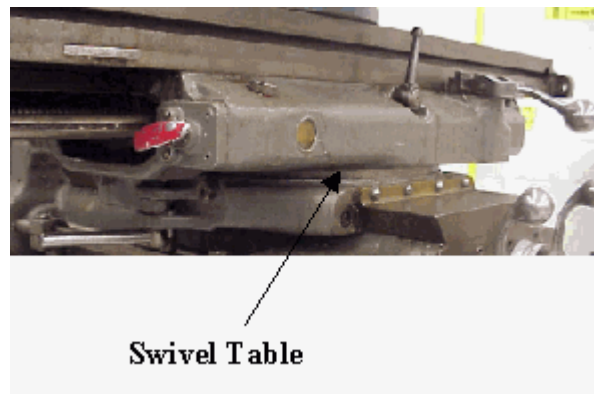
Universal Horizontal Knee and Column Milling Machine with the swivel table.
